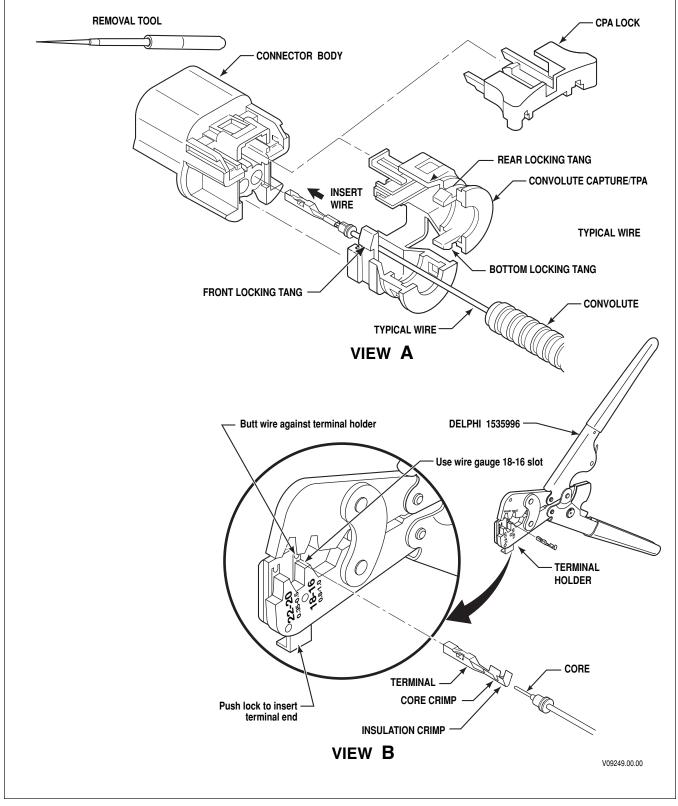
A. Delphi-Packard Metri-Pack GT150 Series Connectors—Push-to-Seat (Speed Sensor; Accumulator Solenoid; Retarder Solenoid)
